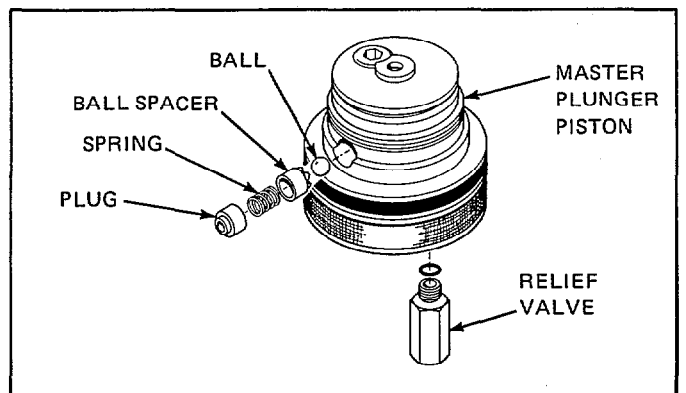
Sequence Valve Ball Assembly and Relief Valve
